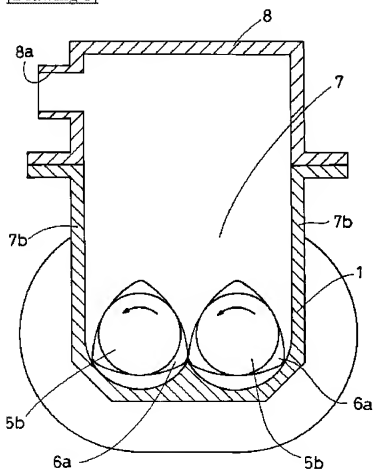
It is the explanatory view of the modification of the above-mentioned pushing implement.
